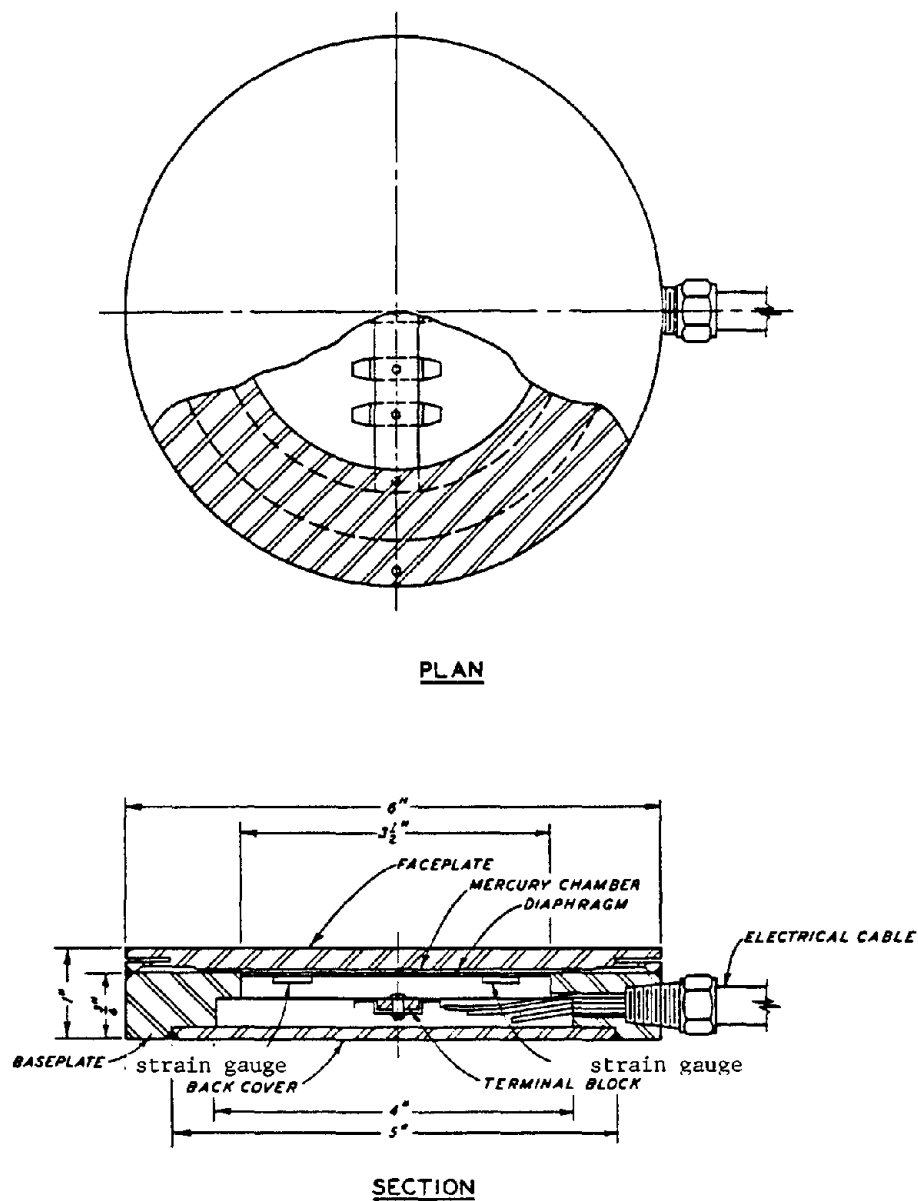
Plan and cross-sectional views of a WES soil pressure cell. [40]
